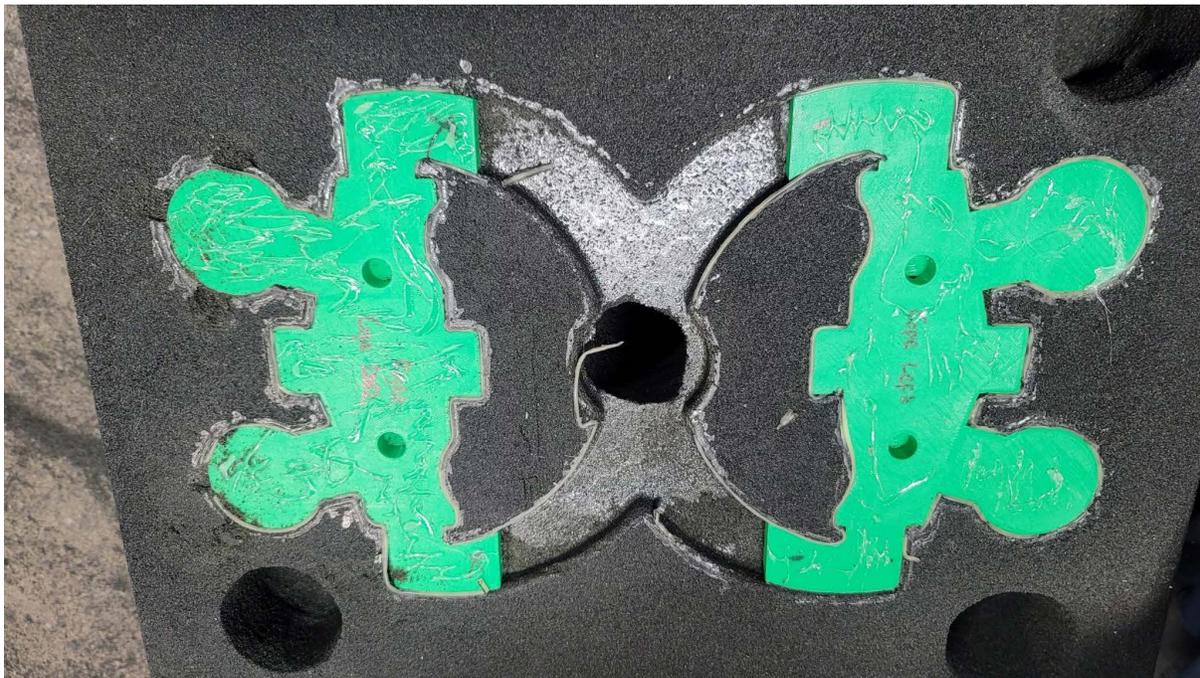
3D Printed mold inserted into the sand to be used for the casting process
